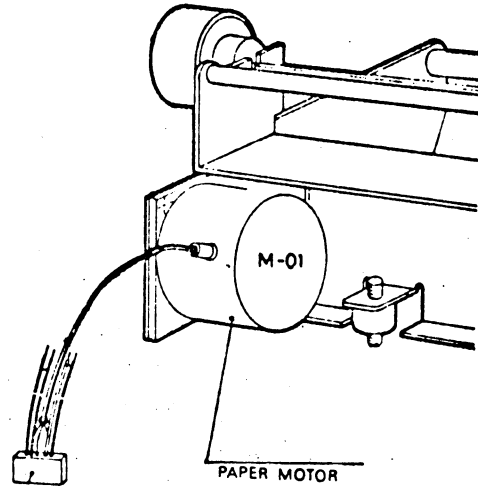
Paper Drive Motor Localization for the Mara Mechanics
